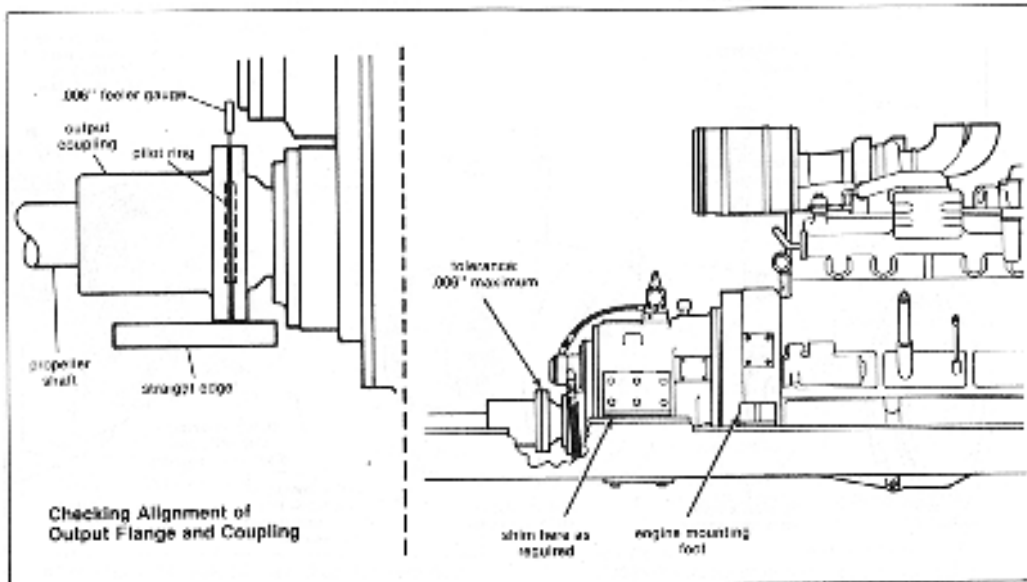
Alignment of Output Flange and Propeller Shaft Coupling
